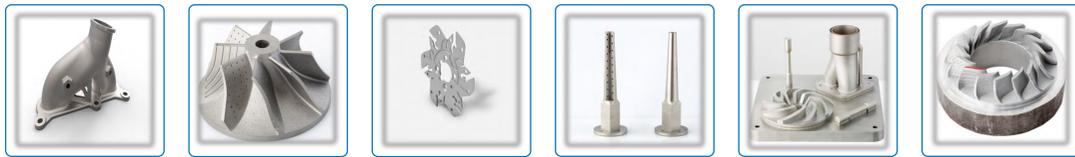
SLM 2800HL 3D printer products from 'Edelstahl Rosswag GmbH' in Pfinztal, such as racing car elbow, impeller or milling machine disc.
